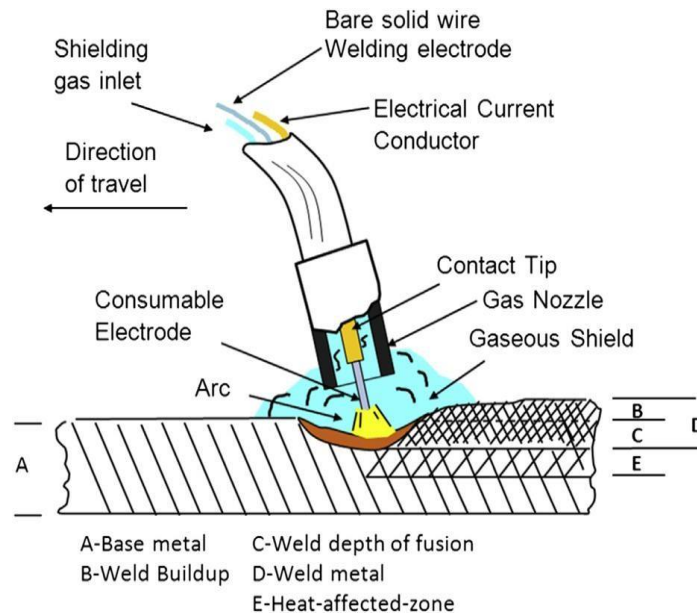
GMAW process (Welding Handbook Welding Science and Technology, 2001)
